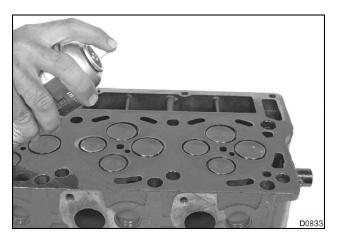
Dye penetrant sprayed on cylinder head (typical)
